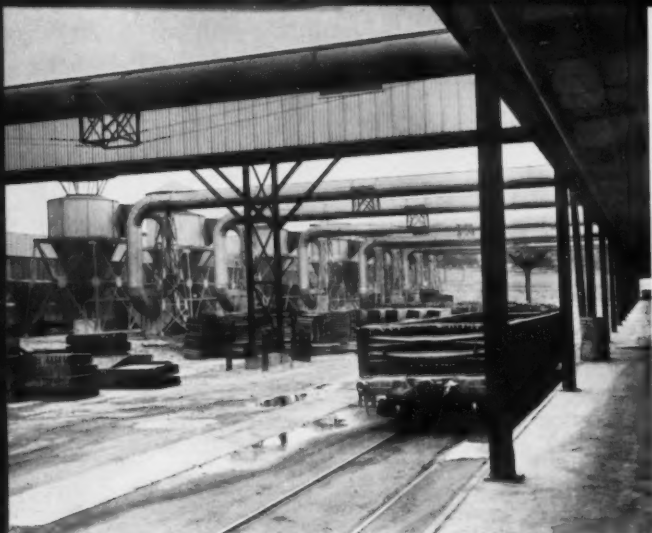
This ten-unit cyclone system outside the plant takes the exhaust from all contour-polishing and buffing machines.
